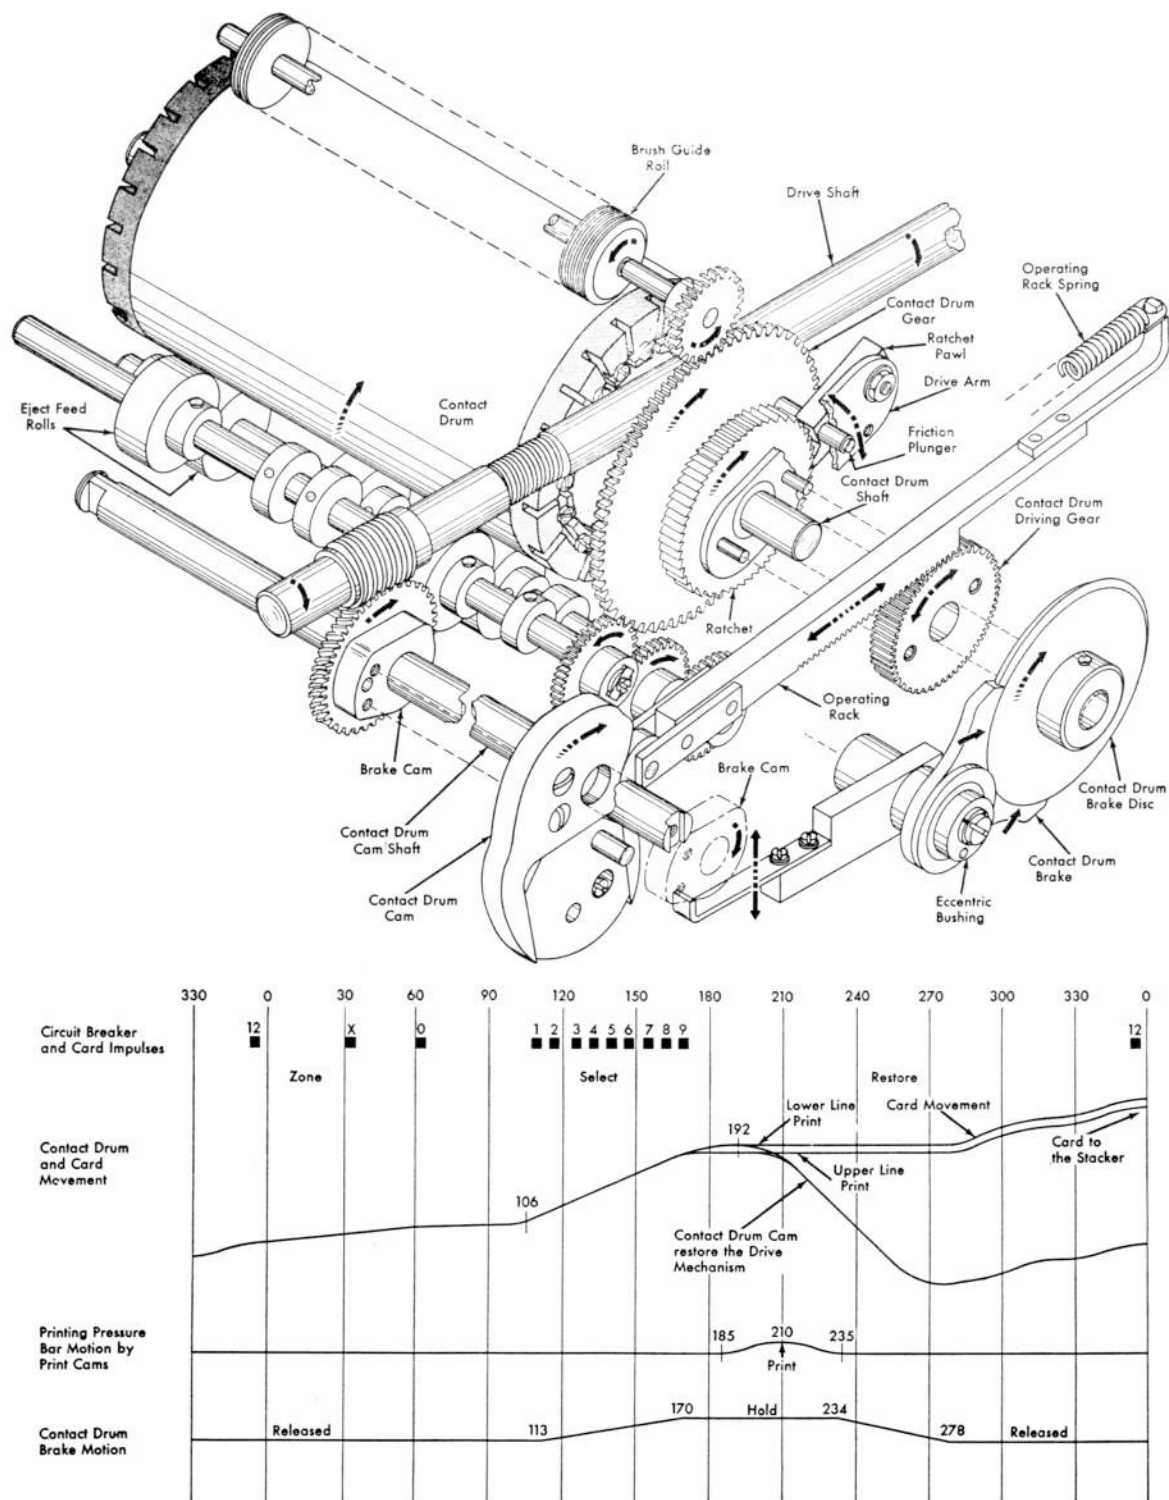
CONTACT DRUM AND DRIVE MECHANISM
